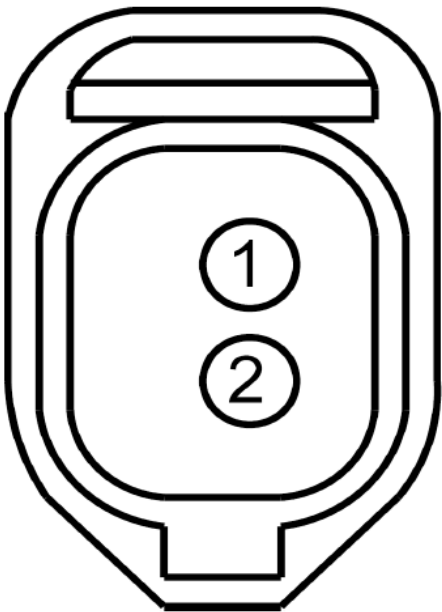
Right Front 1 Parking Lamp Connector End View (C161)
